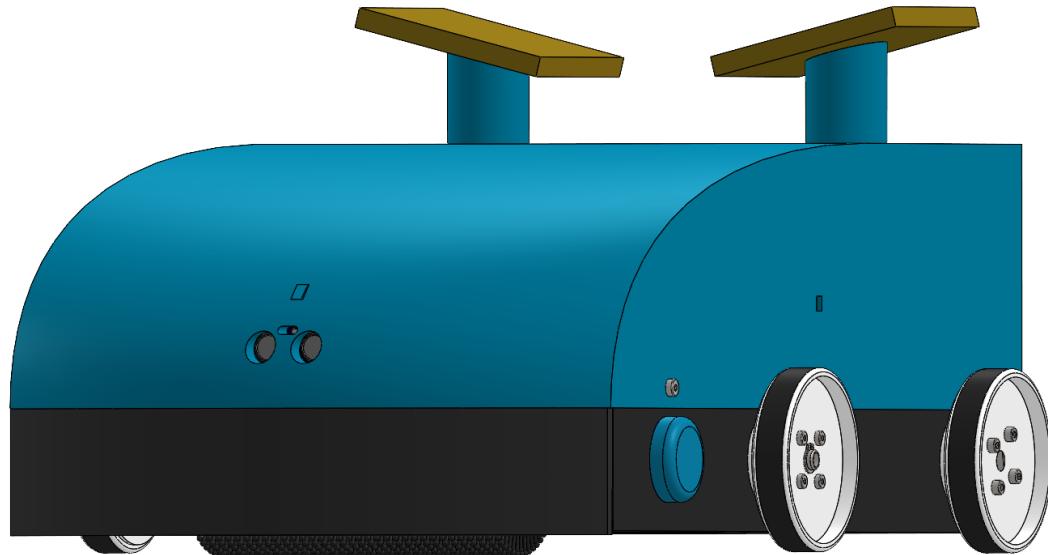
Autonomous Robotic Cobblestone Cleaner
